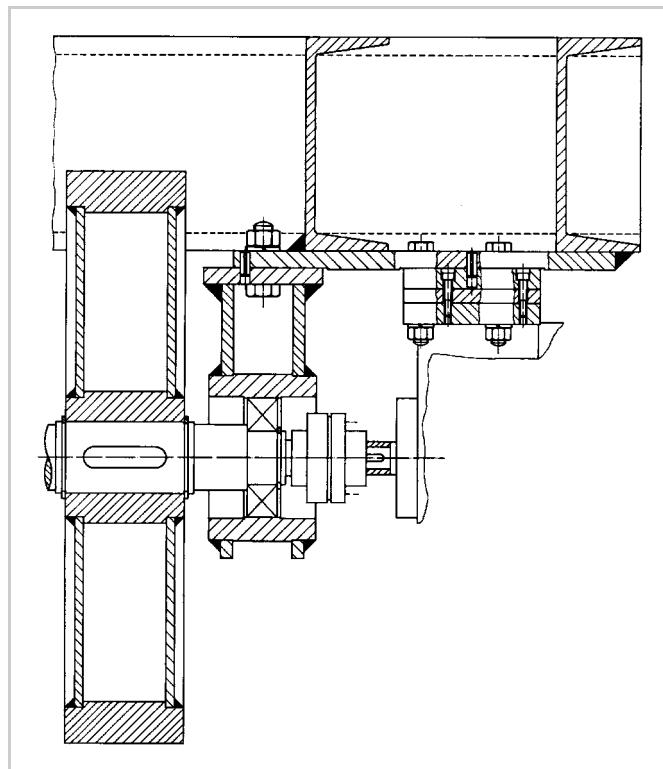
Detailed layout of the flywheel and the flywheel shaft bearing
